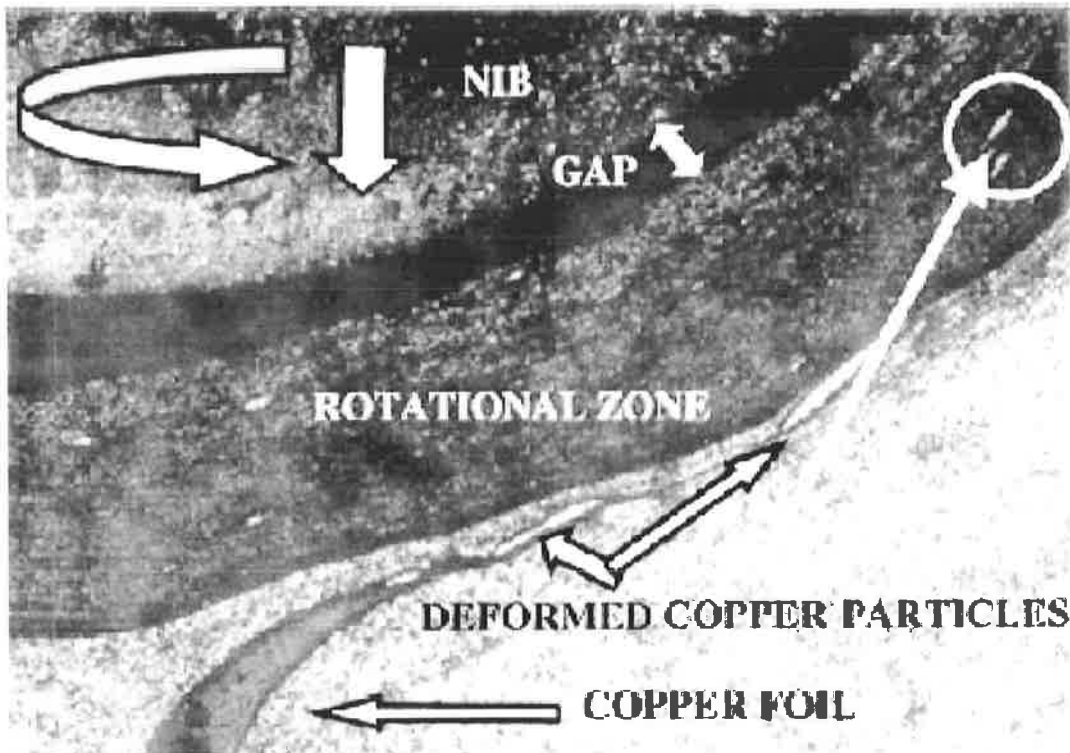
Deformation of the Cu foil ahead of the welding pin [60]
